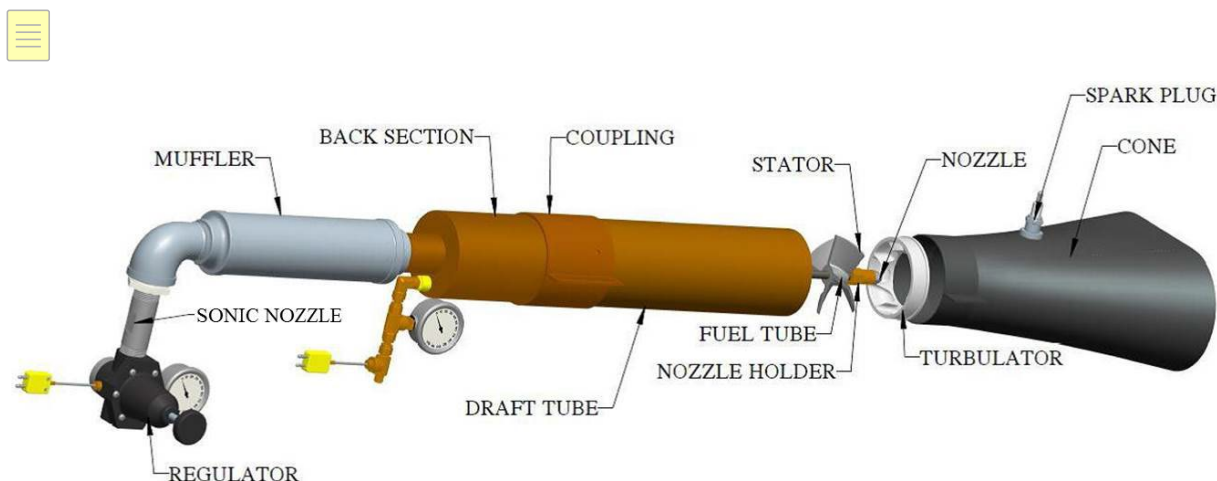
S-2. Schematic of the Sonic Burner - Exploded View
